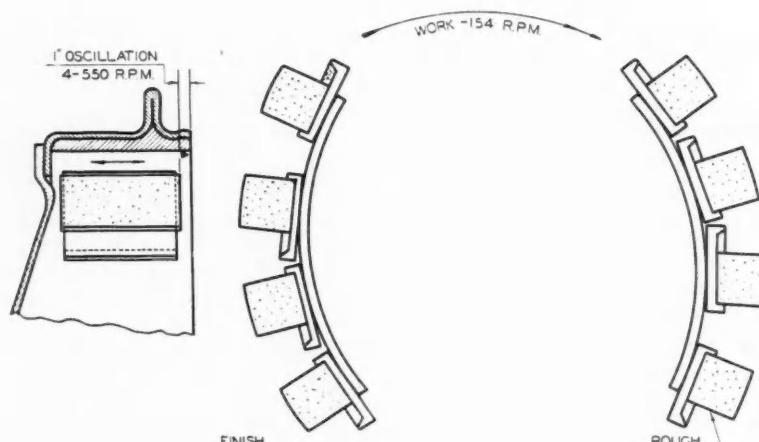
Detail of relatively intricate tool holder set-up for finishing brake drum controlled surface. Stone holders permit oscillation of stones as indicated.
